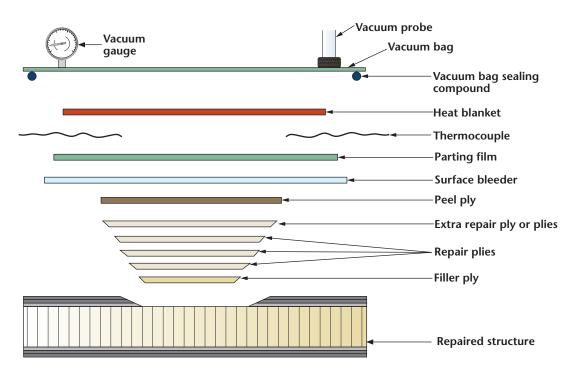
A cross-sectional view of a complete vacuum bagged surface repair for wet lay-up materials.
